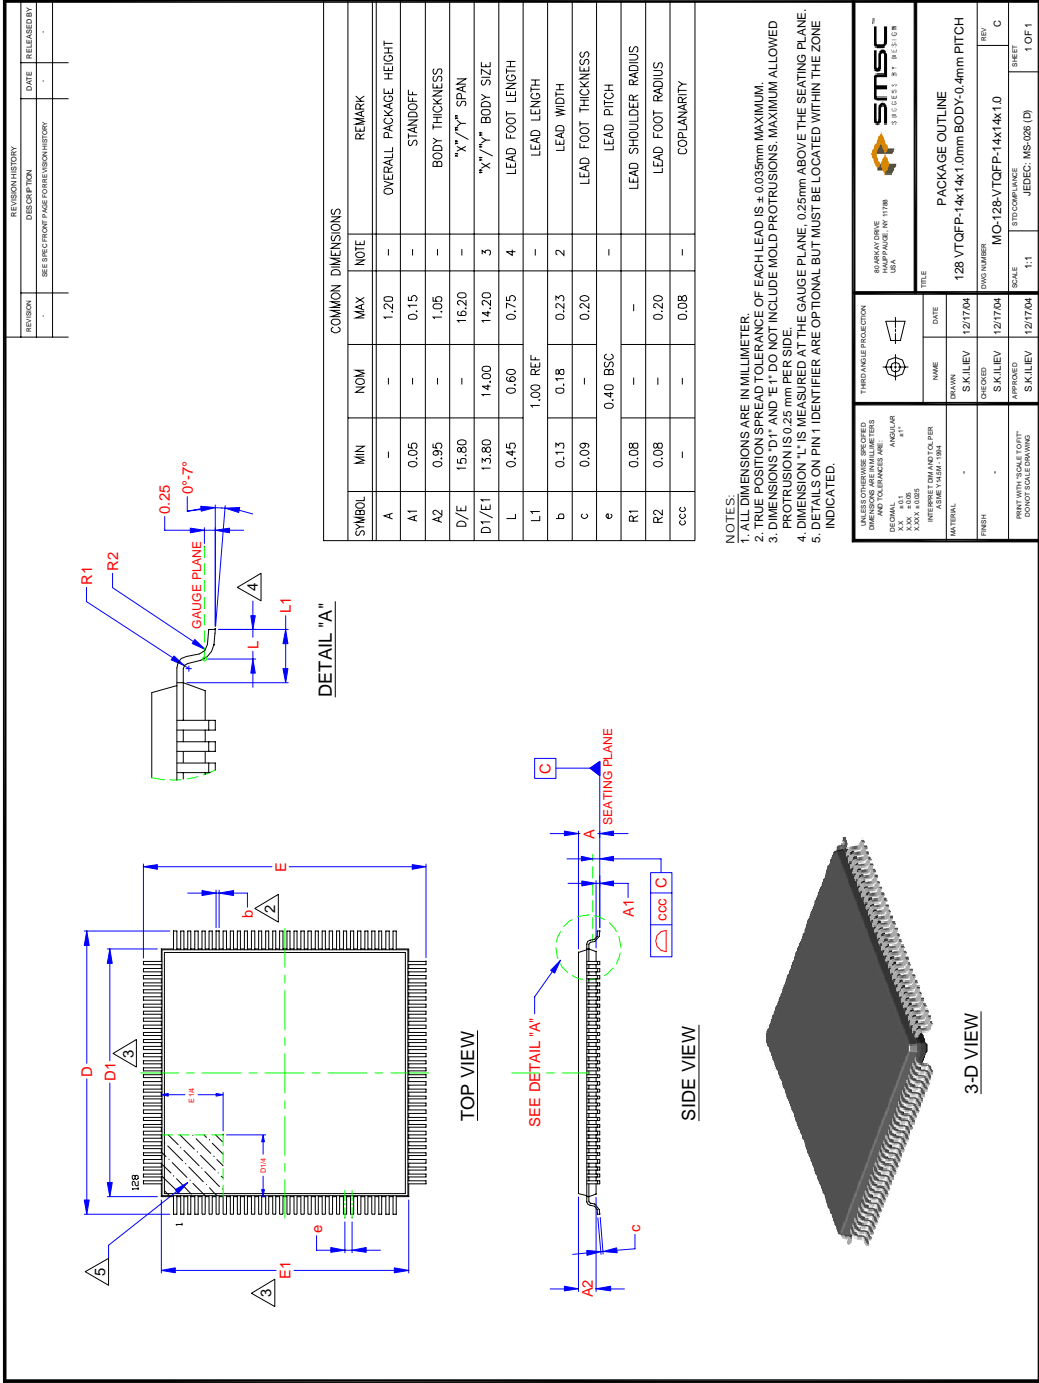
128 Pin VTQFP Package Outline, 14x14x1.0 Body, 2mm Footprint
